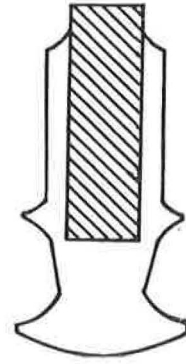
Cross-section of steel encasement type stud, scale approximately 3X actual size.
